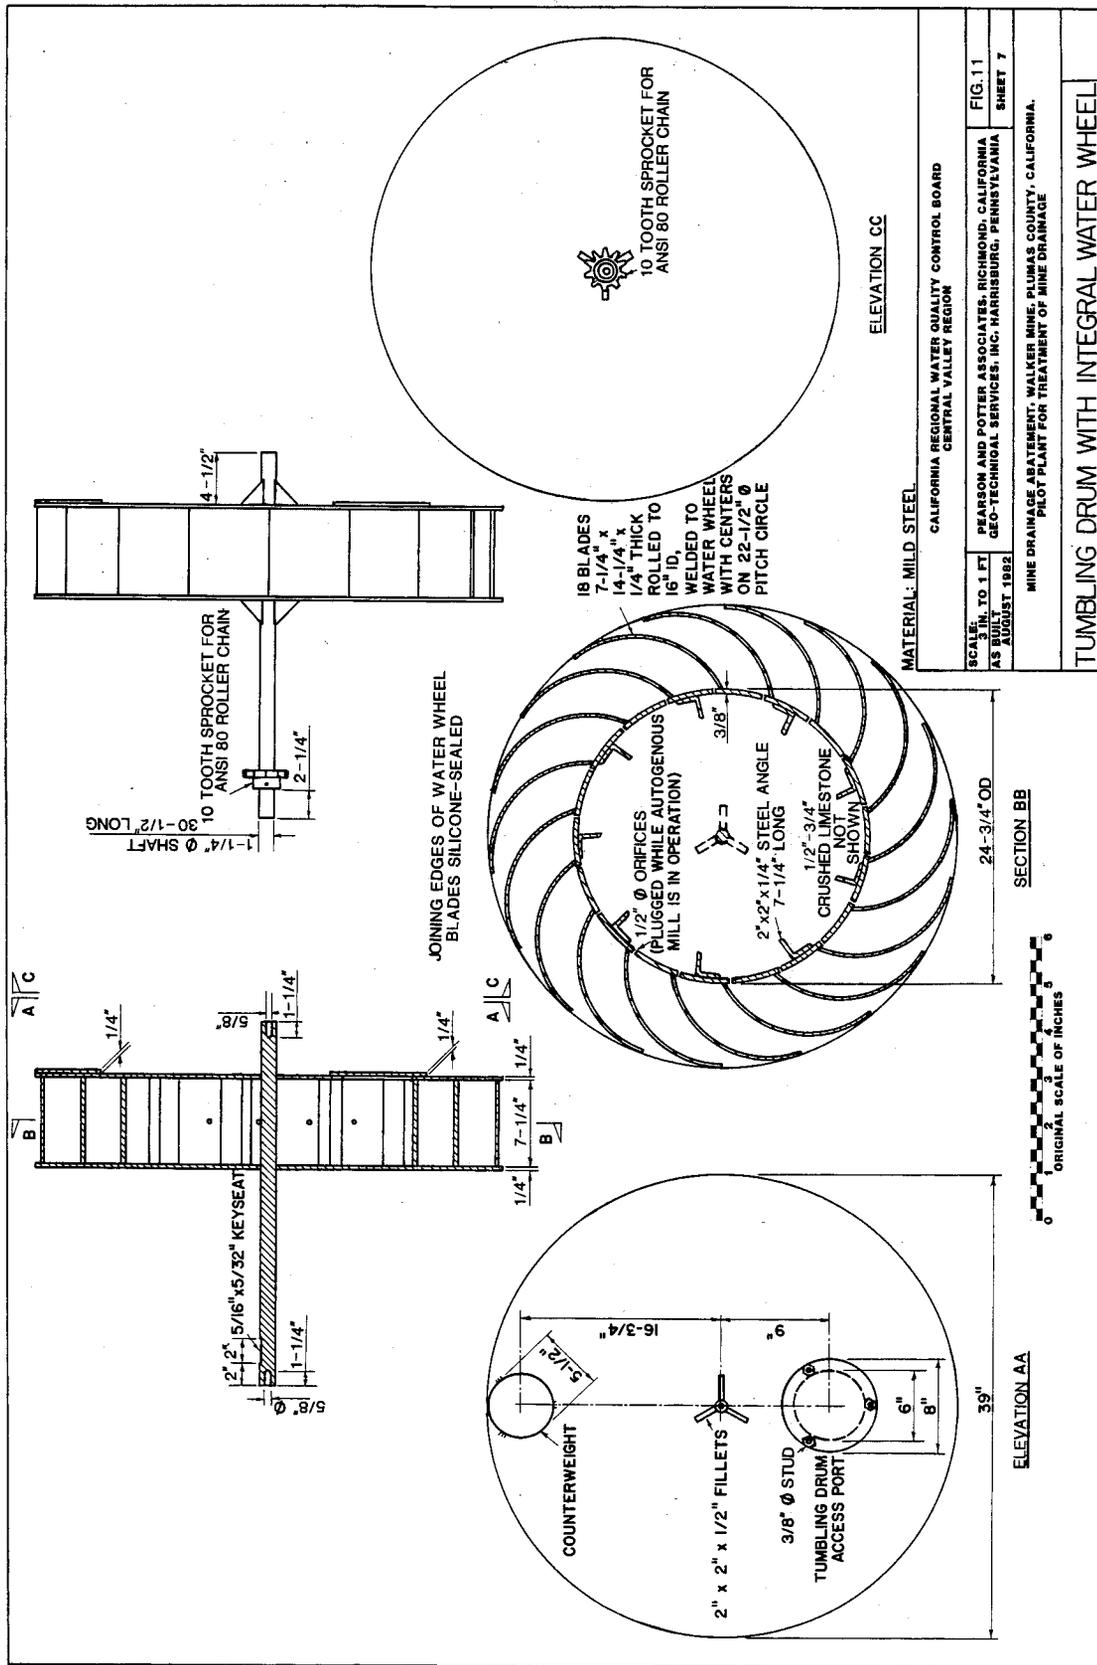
Tumbling Drum With Integral Water Wheel (As-Built Construction Drawing Reduced to 25% Size).
